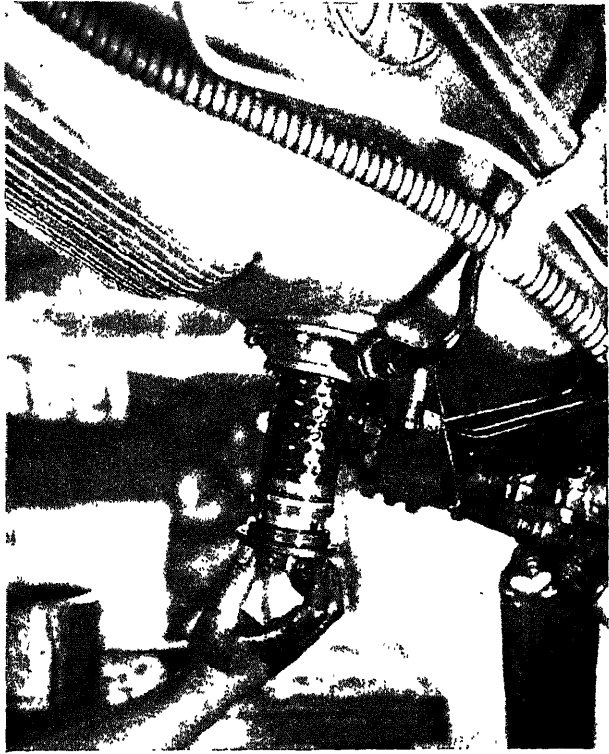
25-HOUR ROUTINE INSPECTION (5)
